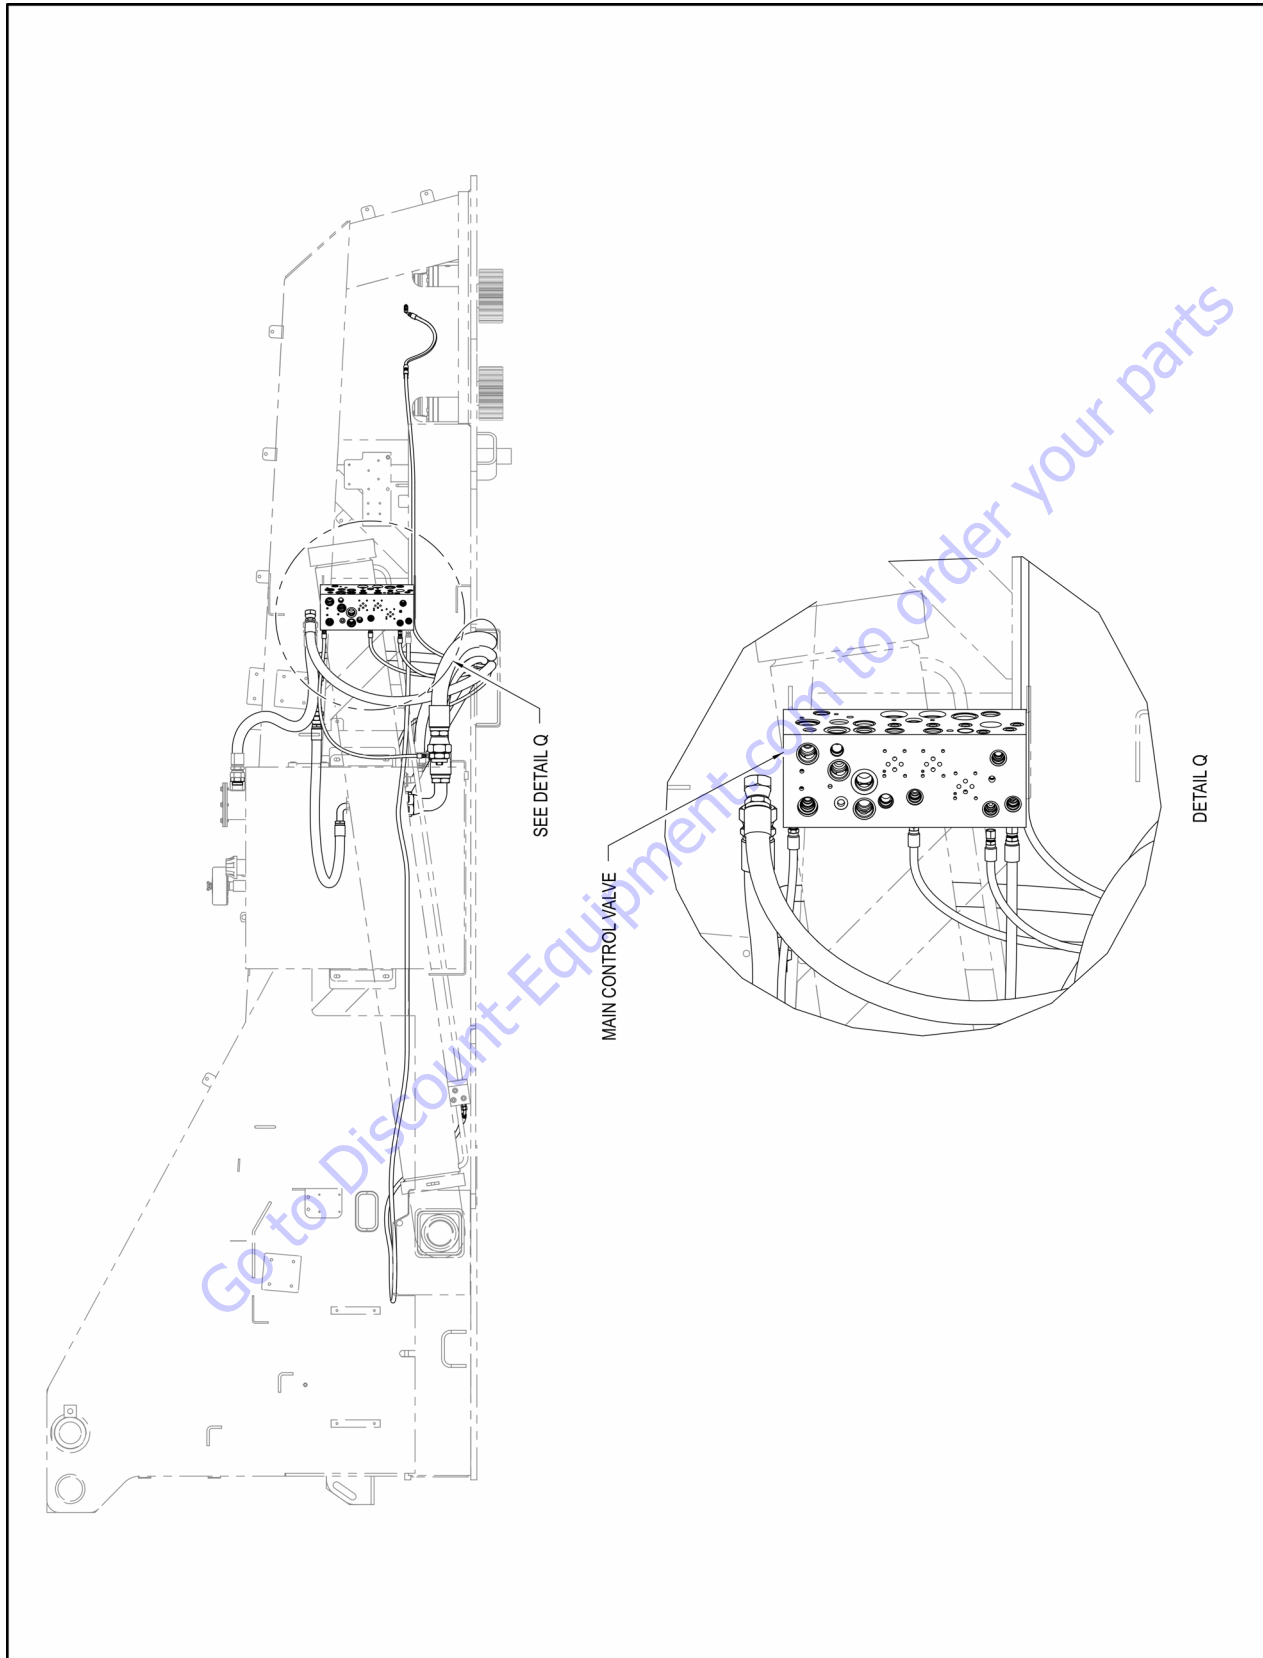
Hydraulic Hose Installation - Sheet 4 of 8
